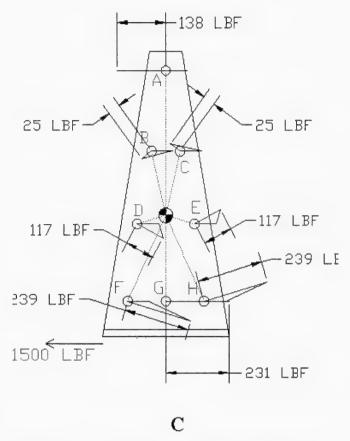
Roof Fitting Bracket - Reactions
